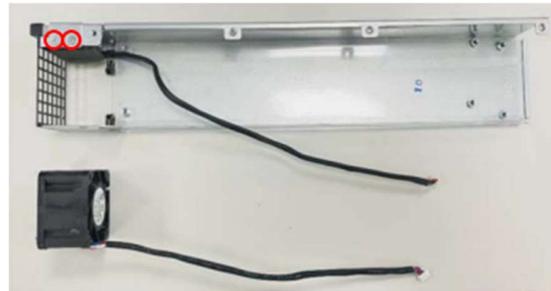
Use tool#1 to unscrew one cross screw and tool#3 to unscrew one torx screw.
